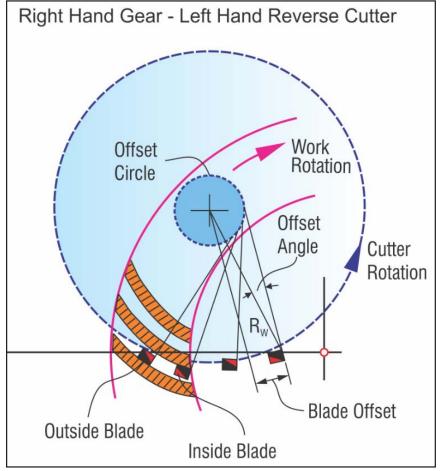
Face hobbing, right-hand gear with left-hand reverse cutter head.
